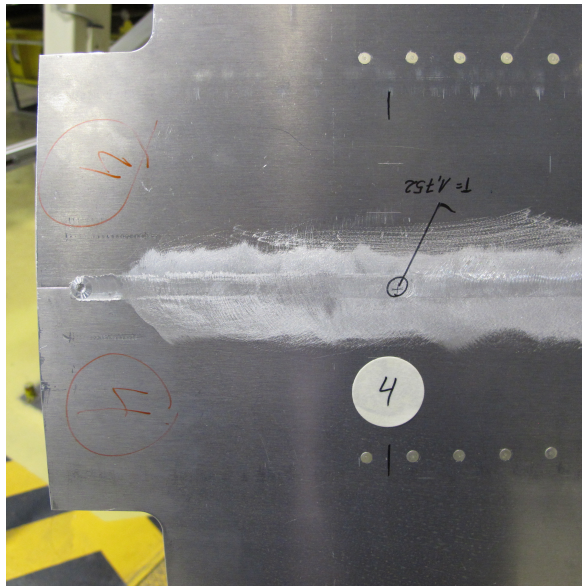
Detail of the end hole of the fuselage's demonstrator. The part with the end hole will be cut. The weld line has been treated to obtain a better final surface finishment
